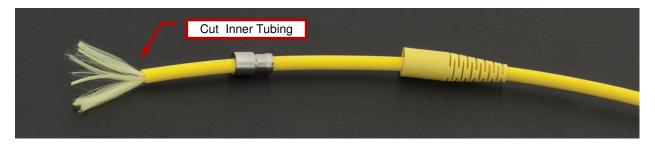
The inner tube is trimmed close to the length of the outer furcation tube.
